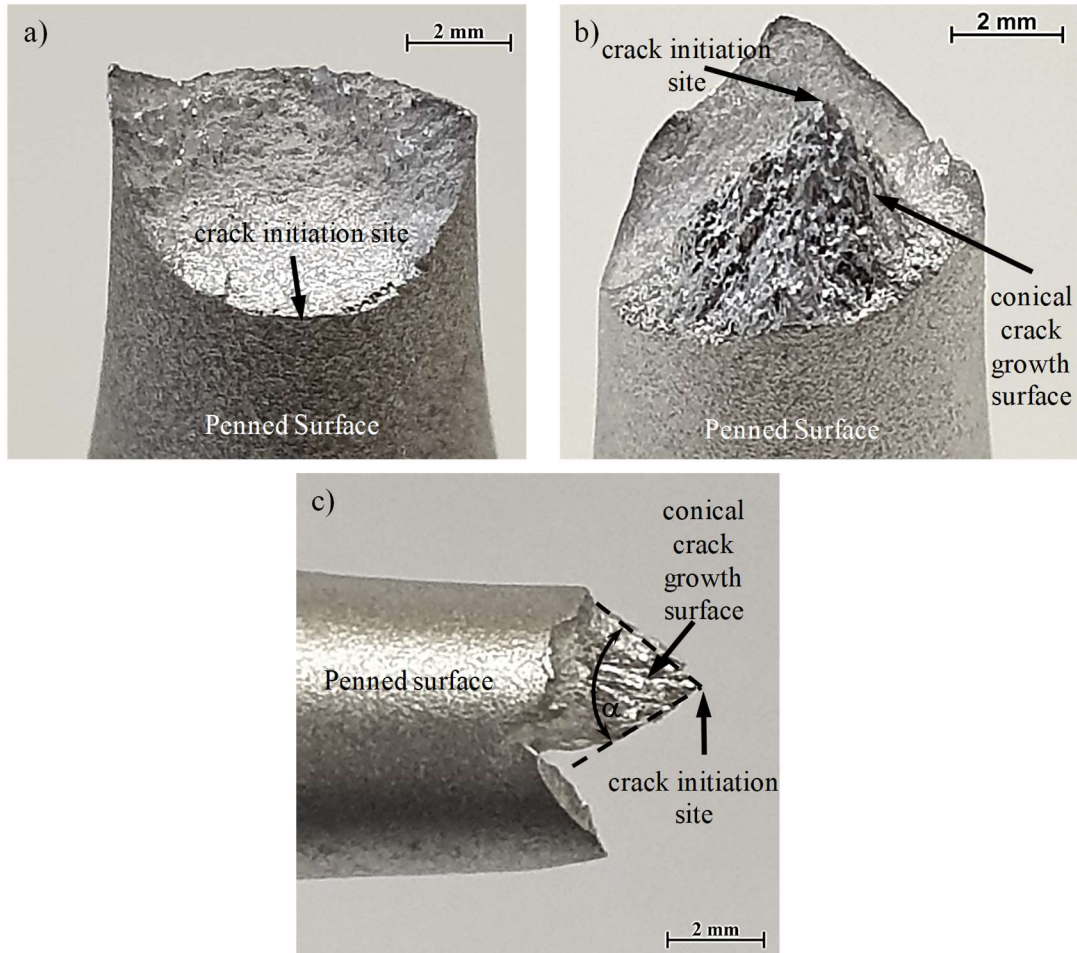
Macro images of fracture surfaces in treated series: a) Crack initiation in S110_11 specimen, b) Internal crack initiation in GB8_11 specimen and c) A lateral image of the conical crack growth surface of GB8_11 specimen.
